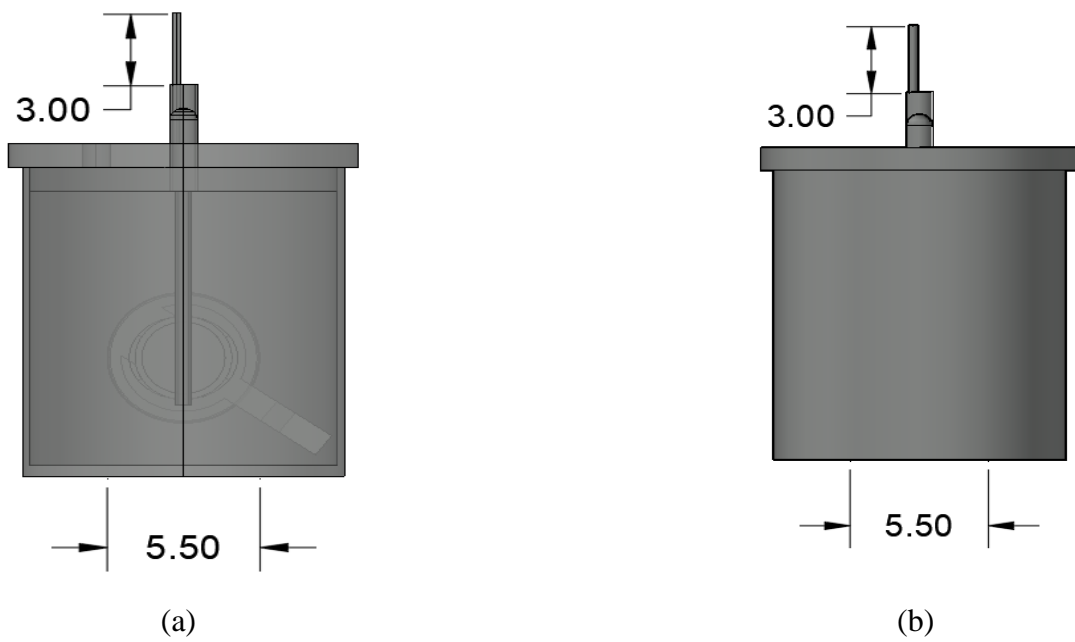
(a) Side view X-Ray style (b) Side view by shade of Gray style
